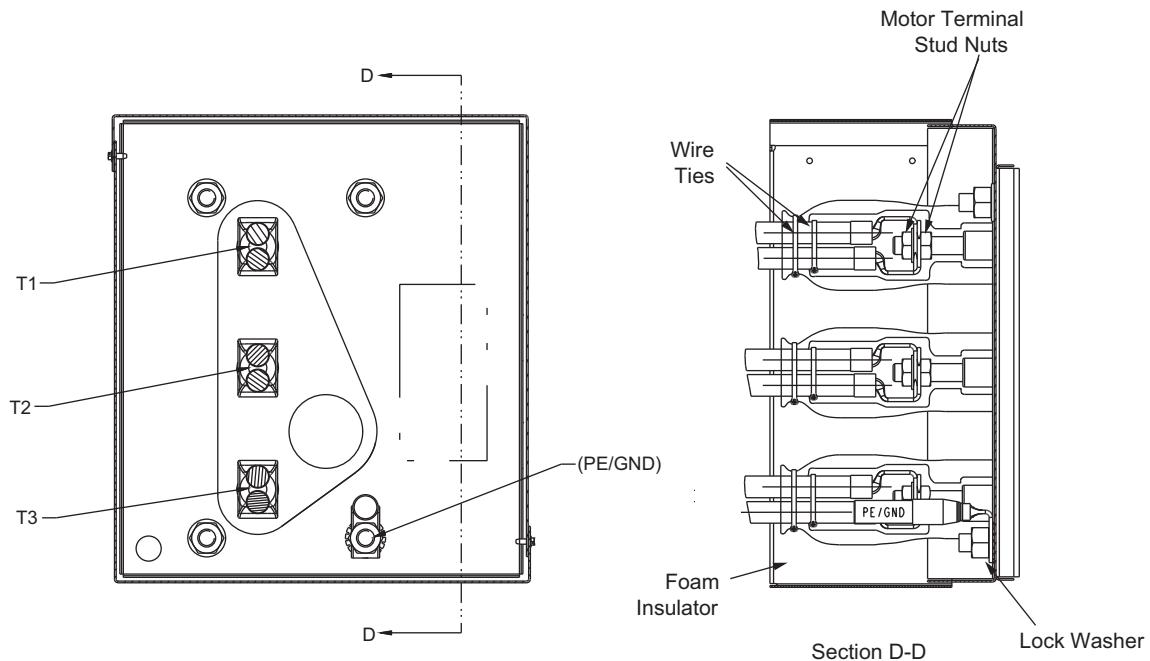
Motor Terminal Box (Q and R Compressors)
